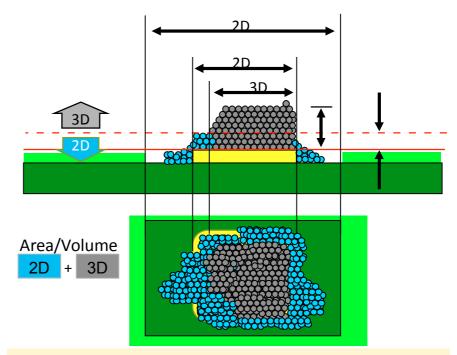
Combined advantages of using 2D and 3D inspection techniques.
